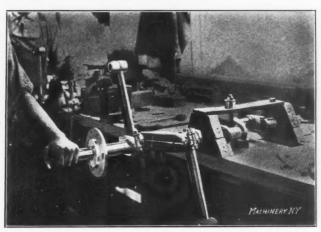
Bench Clamps for Holding Cranks while Fitting the Connecting-rods
